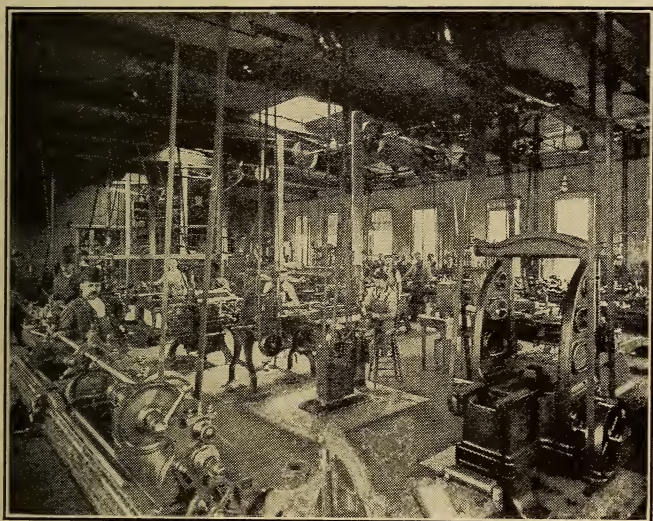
A well lighted workroom having whitened walls, prismatic glass kept clean and shades for windows
